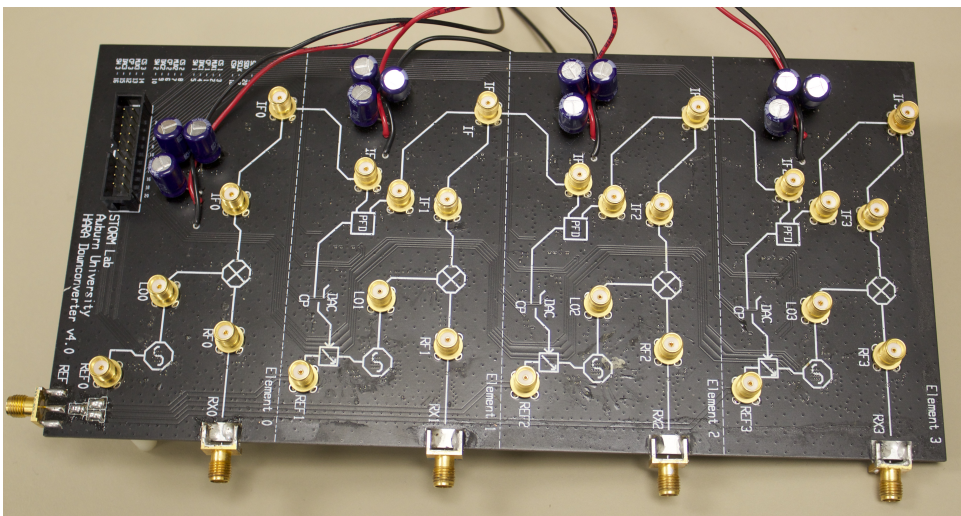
Assembled DLL-HPC received signal beamformer PCB - labeled side
